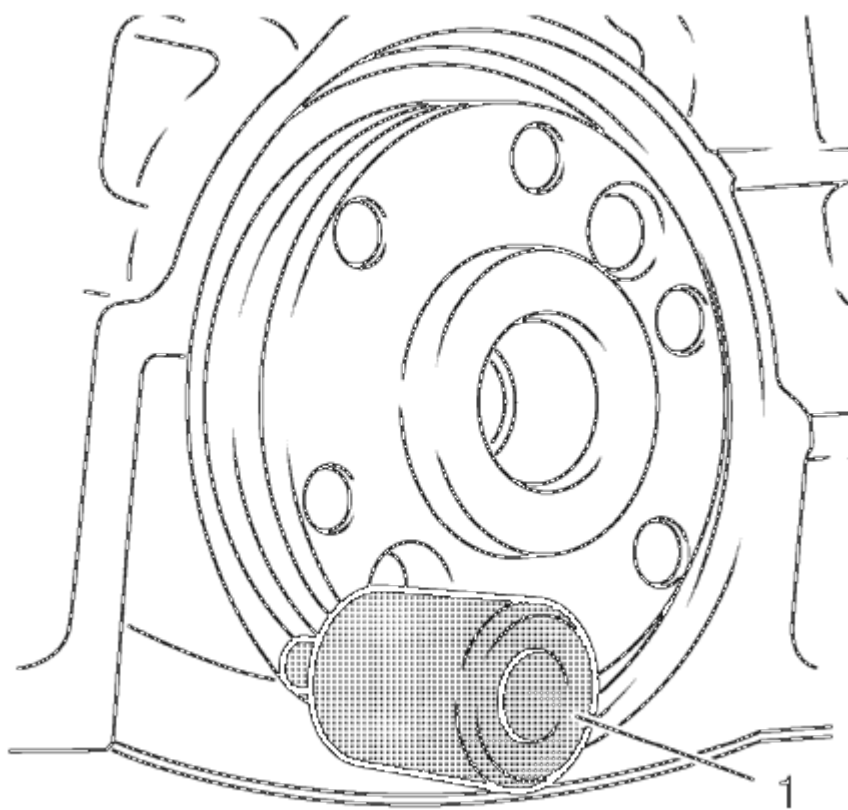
Crankshaft Rear Oil Seal Removal Tool
